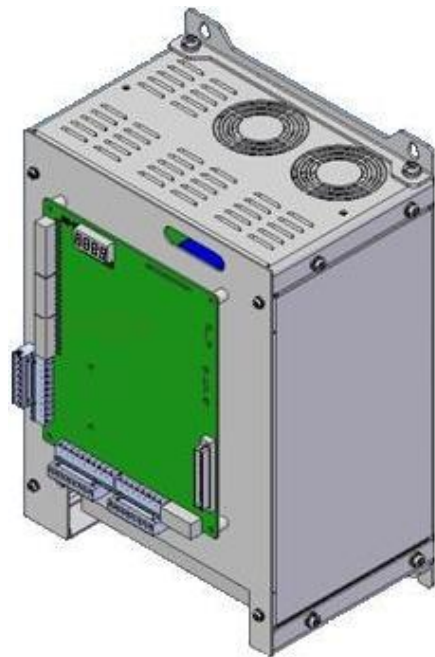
OPEN TYPE EXTERIOR DIMENSION
